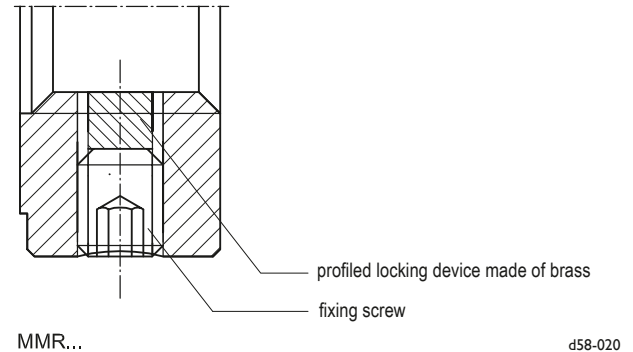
Detail drawing locking system MMR - the same principle also in MMRB and MMRS
